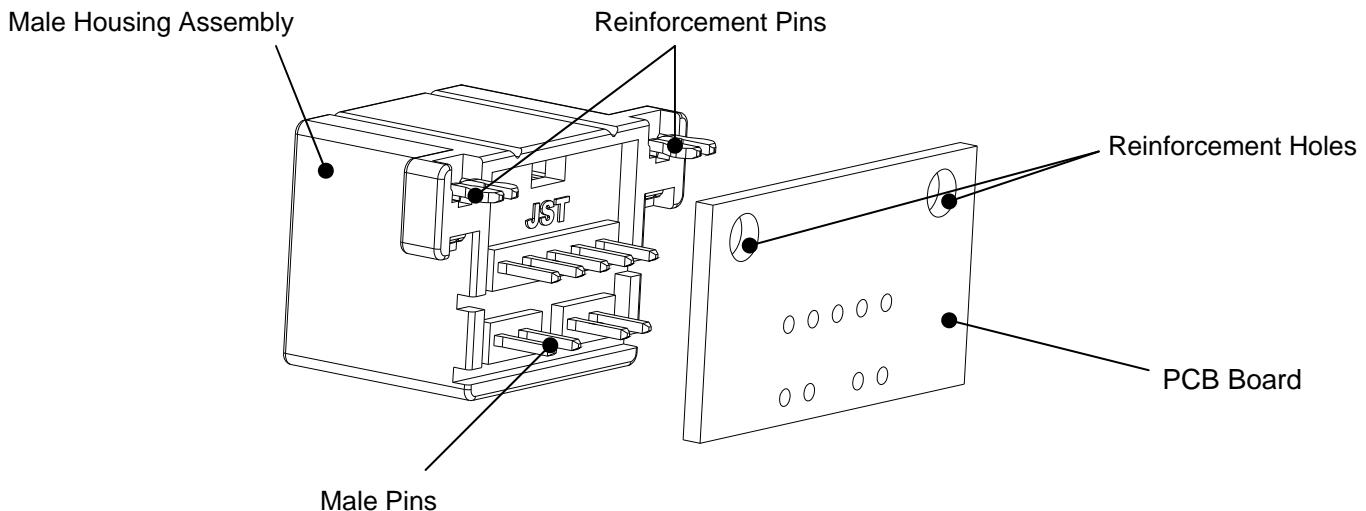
Polarization of the Male Assembly with the PCB Board (e.g. 9 positions)
